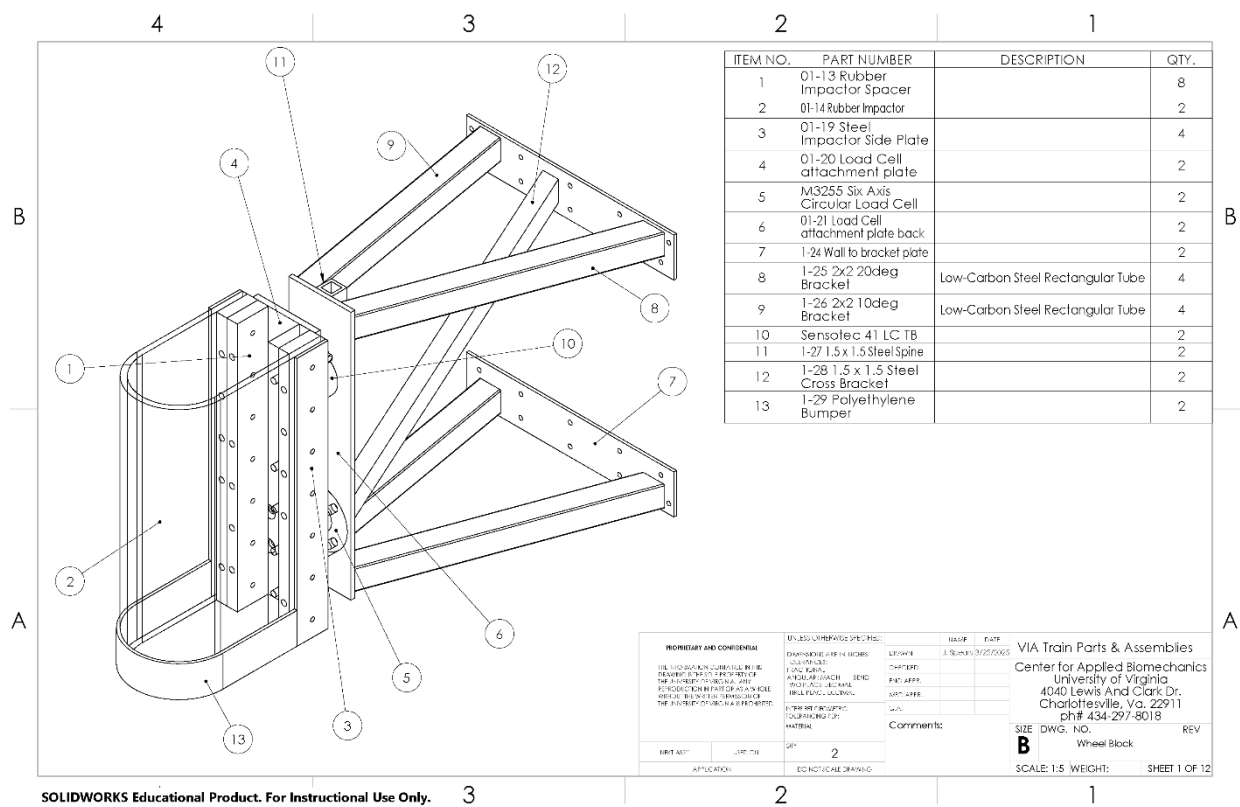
Engineering drawing of wheel-guard testing device used in sled tests.
